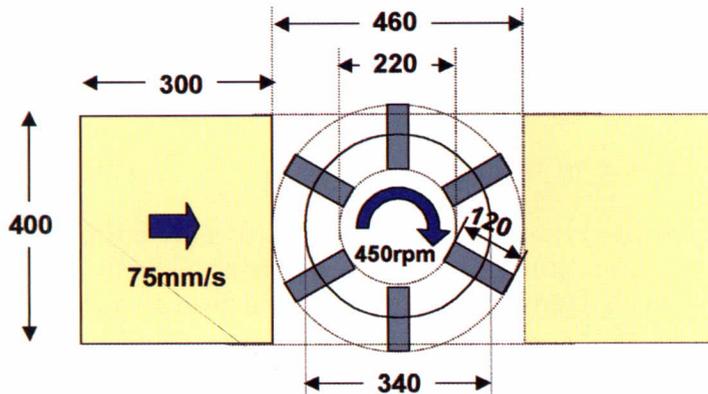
(a) Schematic diagram showing the dimensions of the grinding tool in the polishing process;
